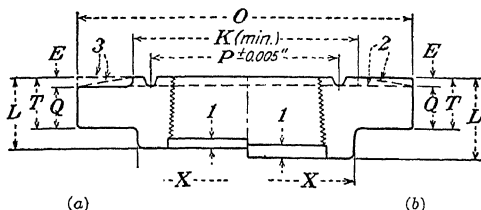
Flange and groove dimensions for ring joints: (a) flange for general or oil-field use when threaded with line-pipe thread; (b) flange for oil-field use except when threaded with line-pipe thread (see Table XI).
